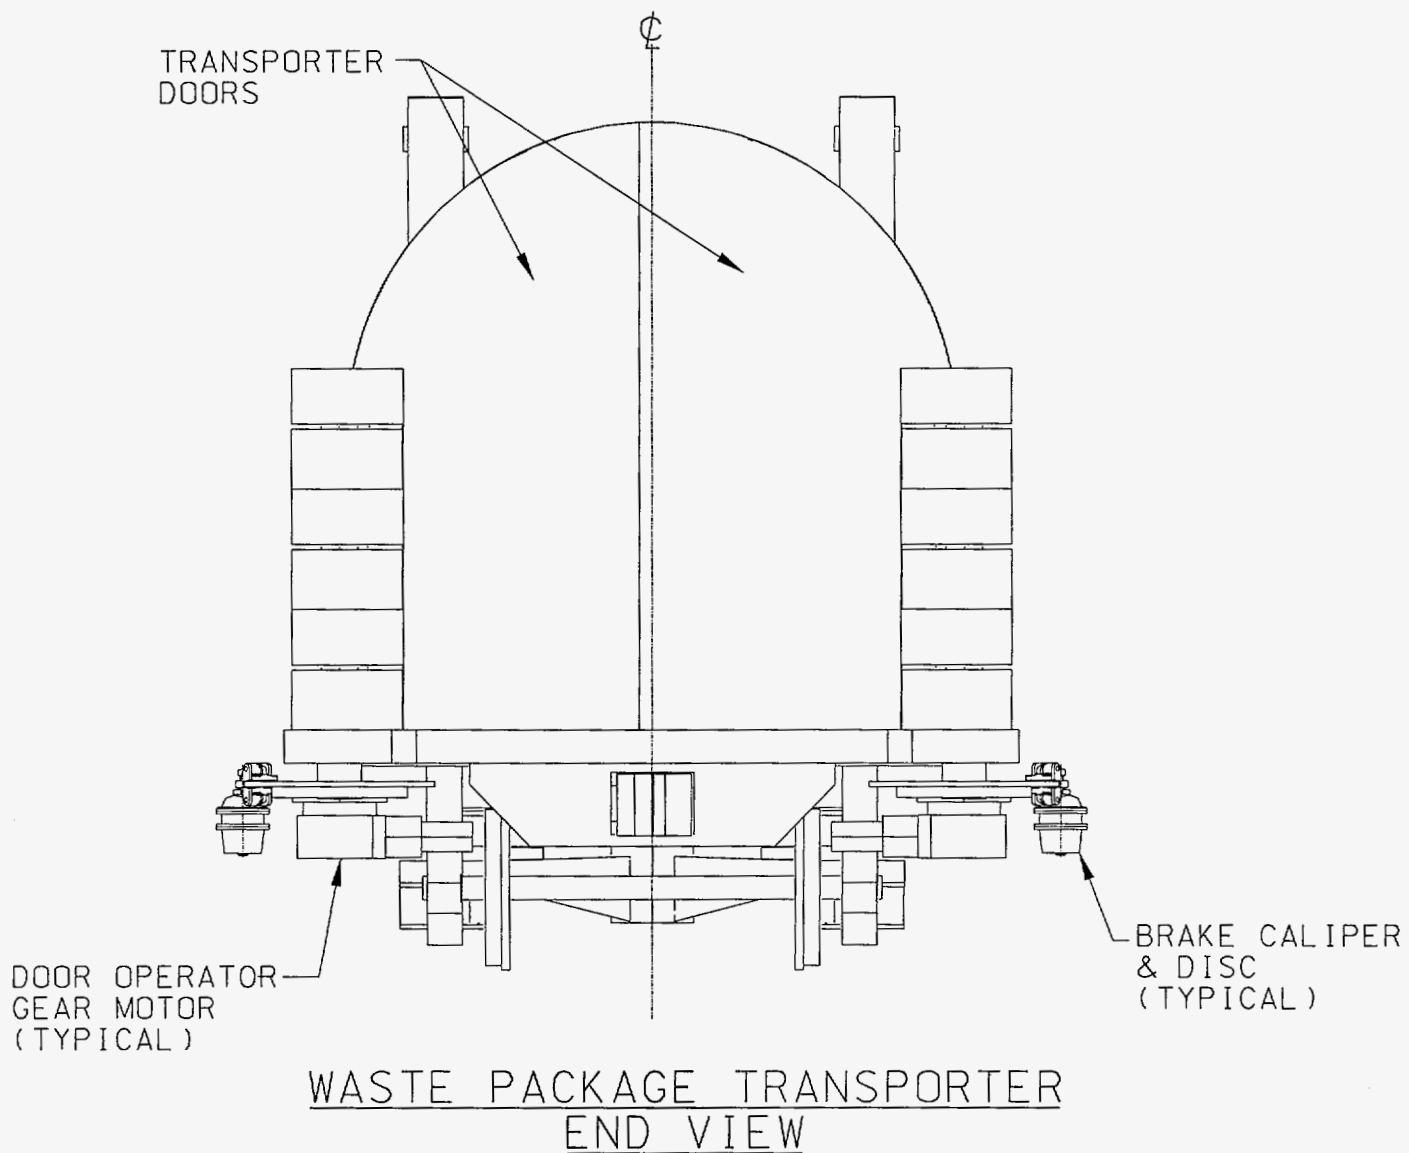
Door Operators with Output Shaft Brake – Concept No. 6 End View
